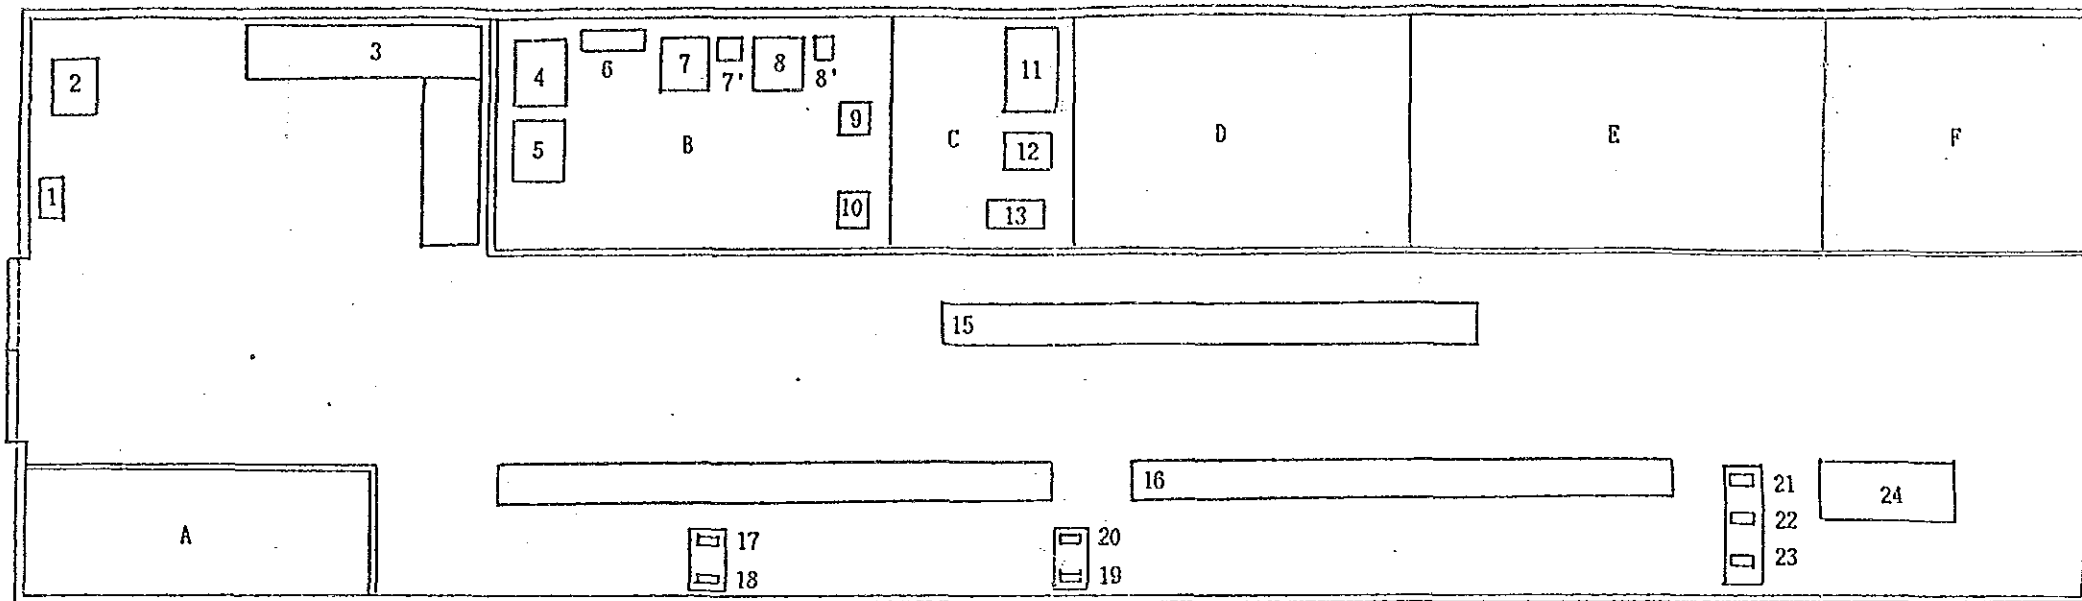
MACHINERY AND EQUIPMENT LAYOUT OF BAKELITE MOLDING SHOP
